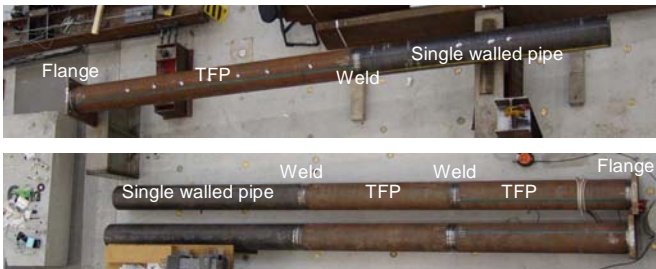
TFP test pipes without (top) and with (bottom) a TFP circumferential weld
